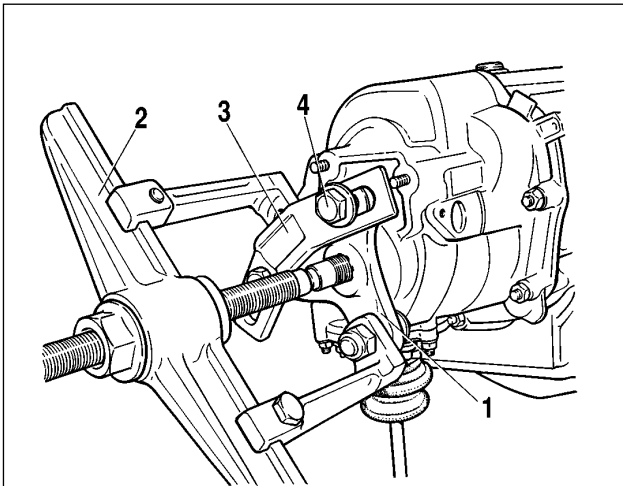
Removing the coupling flange using tool A.40005/3/9B/9C:
